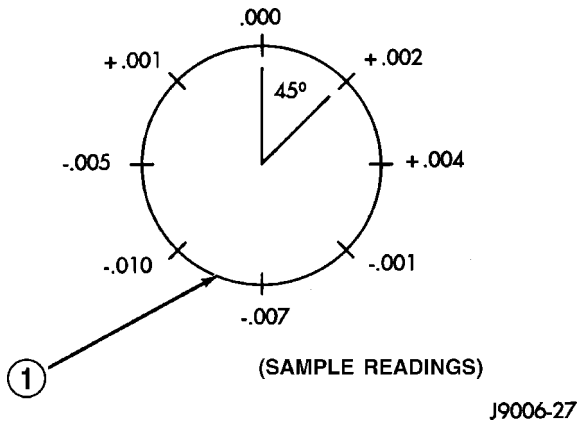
CLUTCH HOUSING BORE RUNOUT
